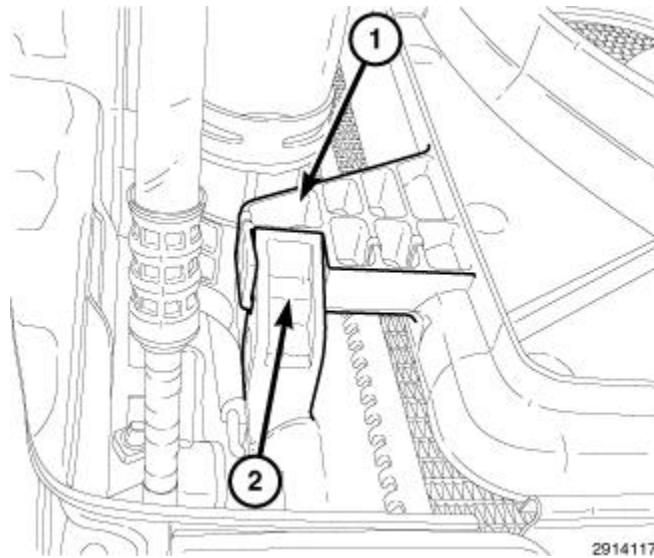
Radiator Cooling Fan Assembly & Radiator Mounts
